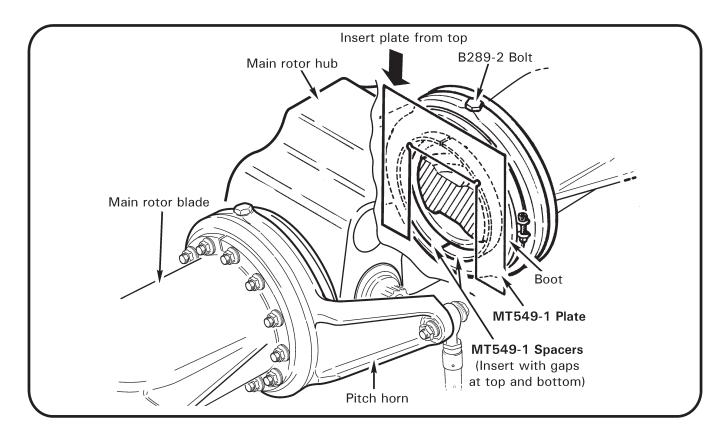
ADJUSTING BOOT CLEARANCE
